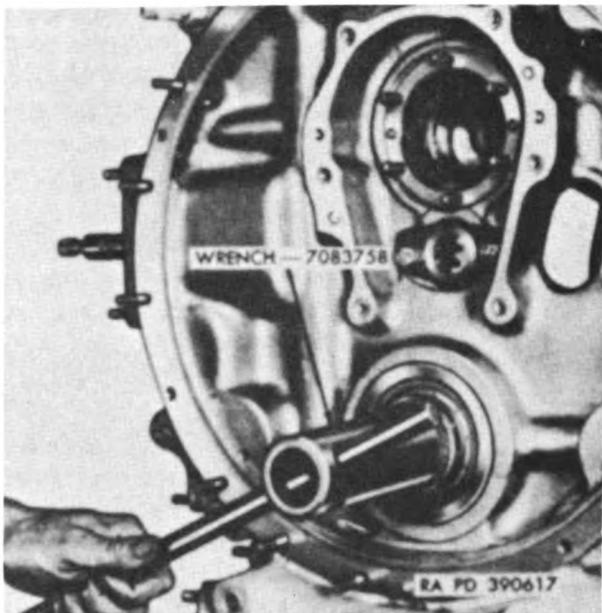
Removing or installing accessory drive gear bearing nut (early model AOSI-895-5M engines only).
